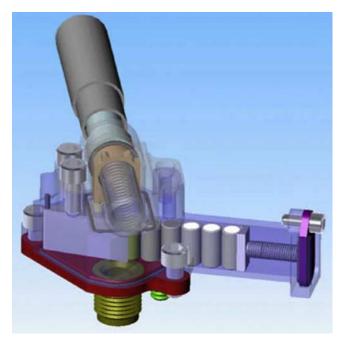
Diagram of the beaker reagent dispenser assembly showing five crucibles ready for deployment. Courtesy of SpaceDev.
